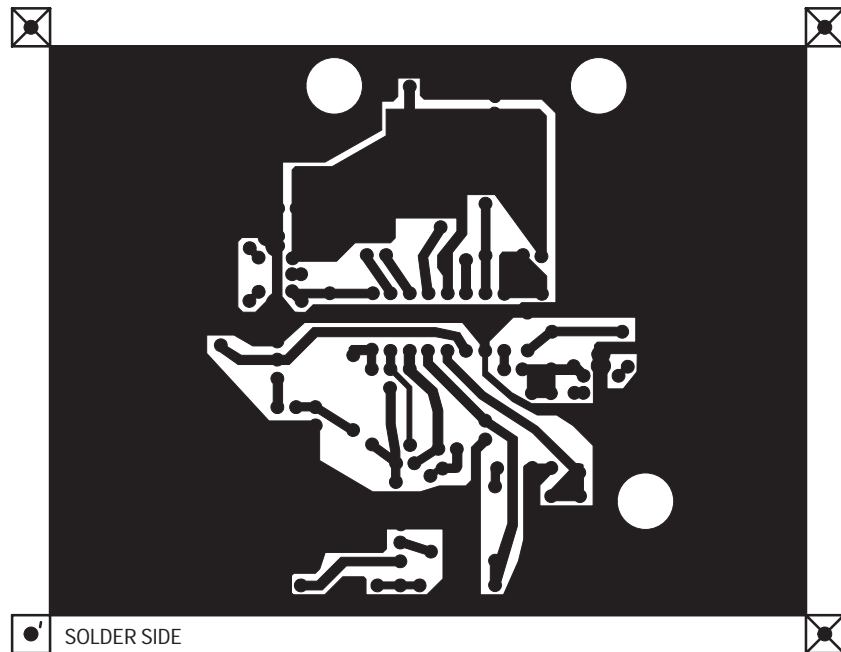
MC3371 PC Board Circuit or Solder Side as Viewed through Component Side
